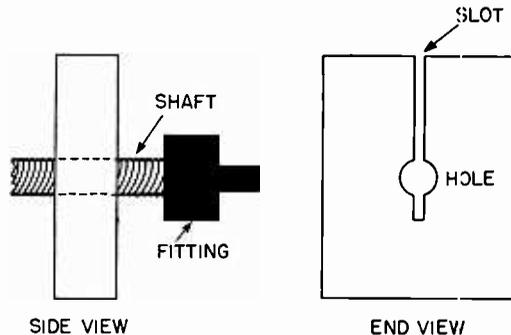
Home-made "jig" for holding flexible shafts, for removing or replacing fittings, cutting, etc. It is simply a block of metal, aluminum, brass, or any available metal, with a $\frac{1}{8}$ inch hole drilled through it, and a slot cut with a hacksaw down through the hole. In use, it is "pinched" in a vise, with the shaft placed in the hole. The tension allowed by the slot causes the sides of the hole to hold the shaft firmly, preventing their unwinding.
